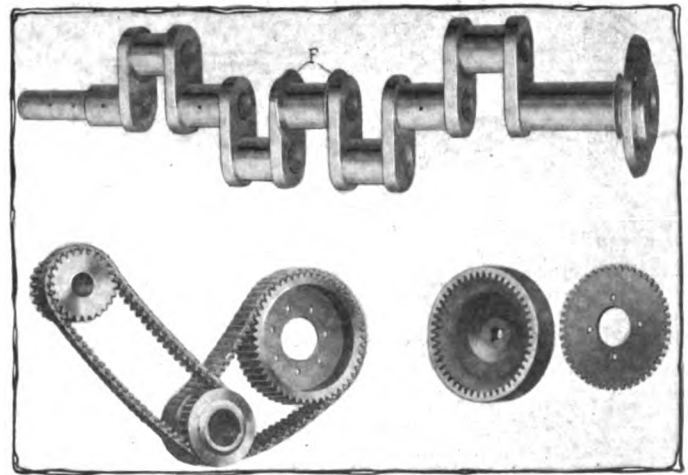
Top view shows hollow crankshaft with integral flanges at the center main bearing to take end thrust. Below, arrangement of silent chain drive for eccentric and magneto shafts
